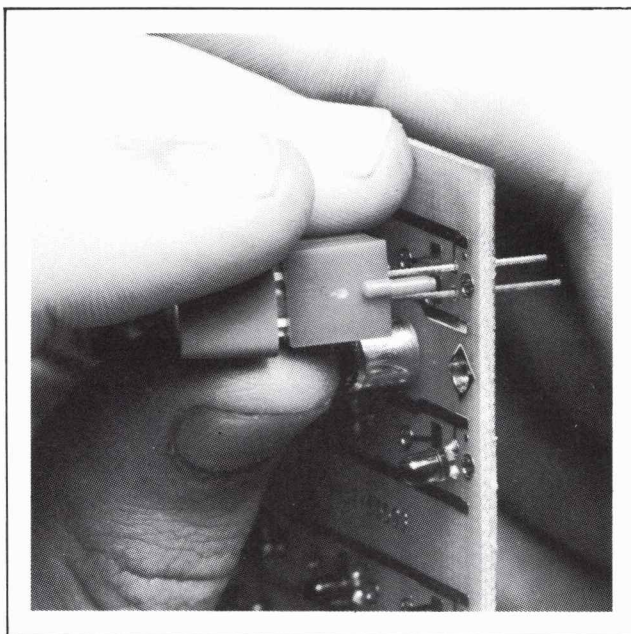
Display P.C. Board Assembly Switch/LED Installation.
